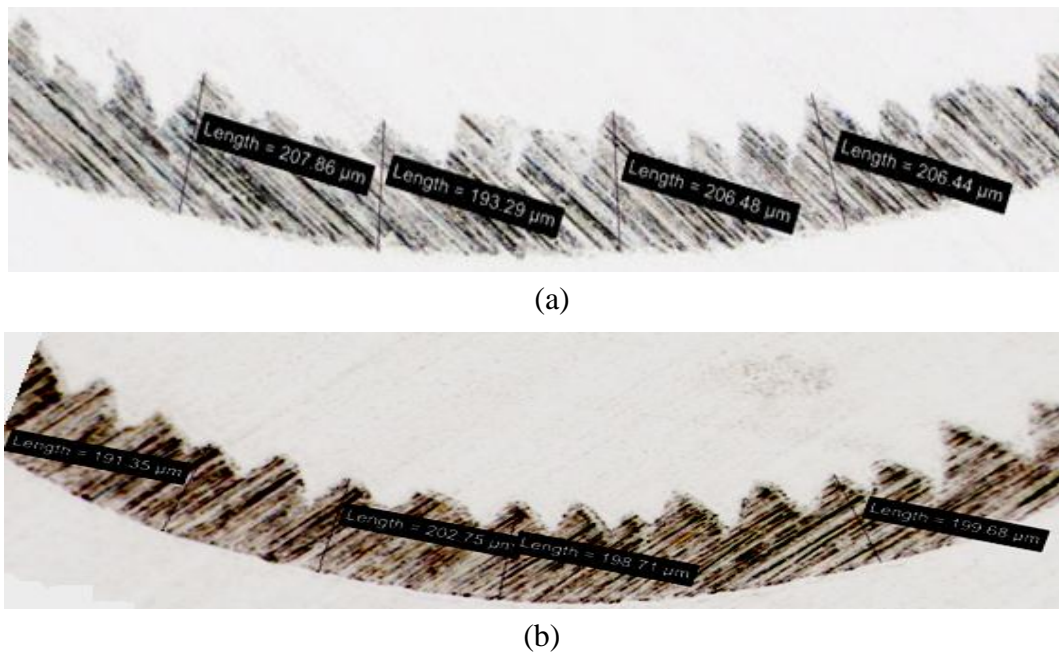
Chip cross-section for positive chip breaker tool: (a) Uncoated (b) TiB_2 coated tool
